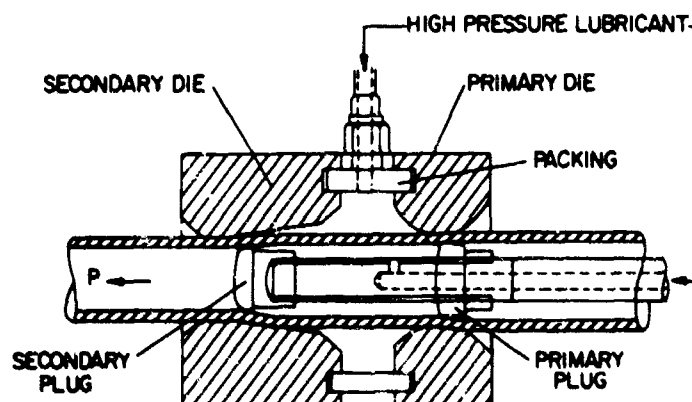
Proposed method for supplying lubricant under pressure to both internal and external tube surfaces in tube drawing [130].
